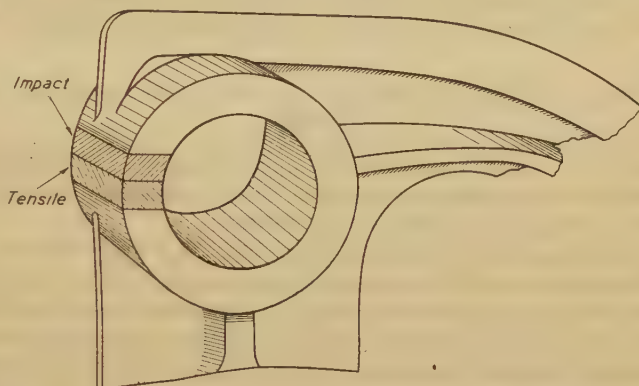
Position of Mechanical Test-Pieces taken from Boss of Pivot Bracket.
